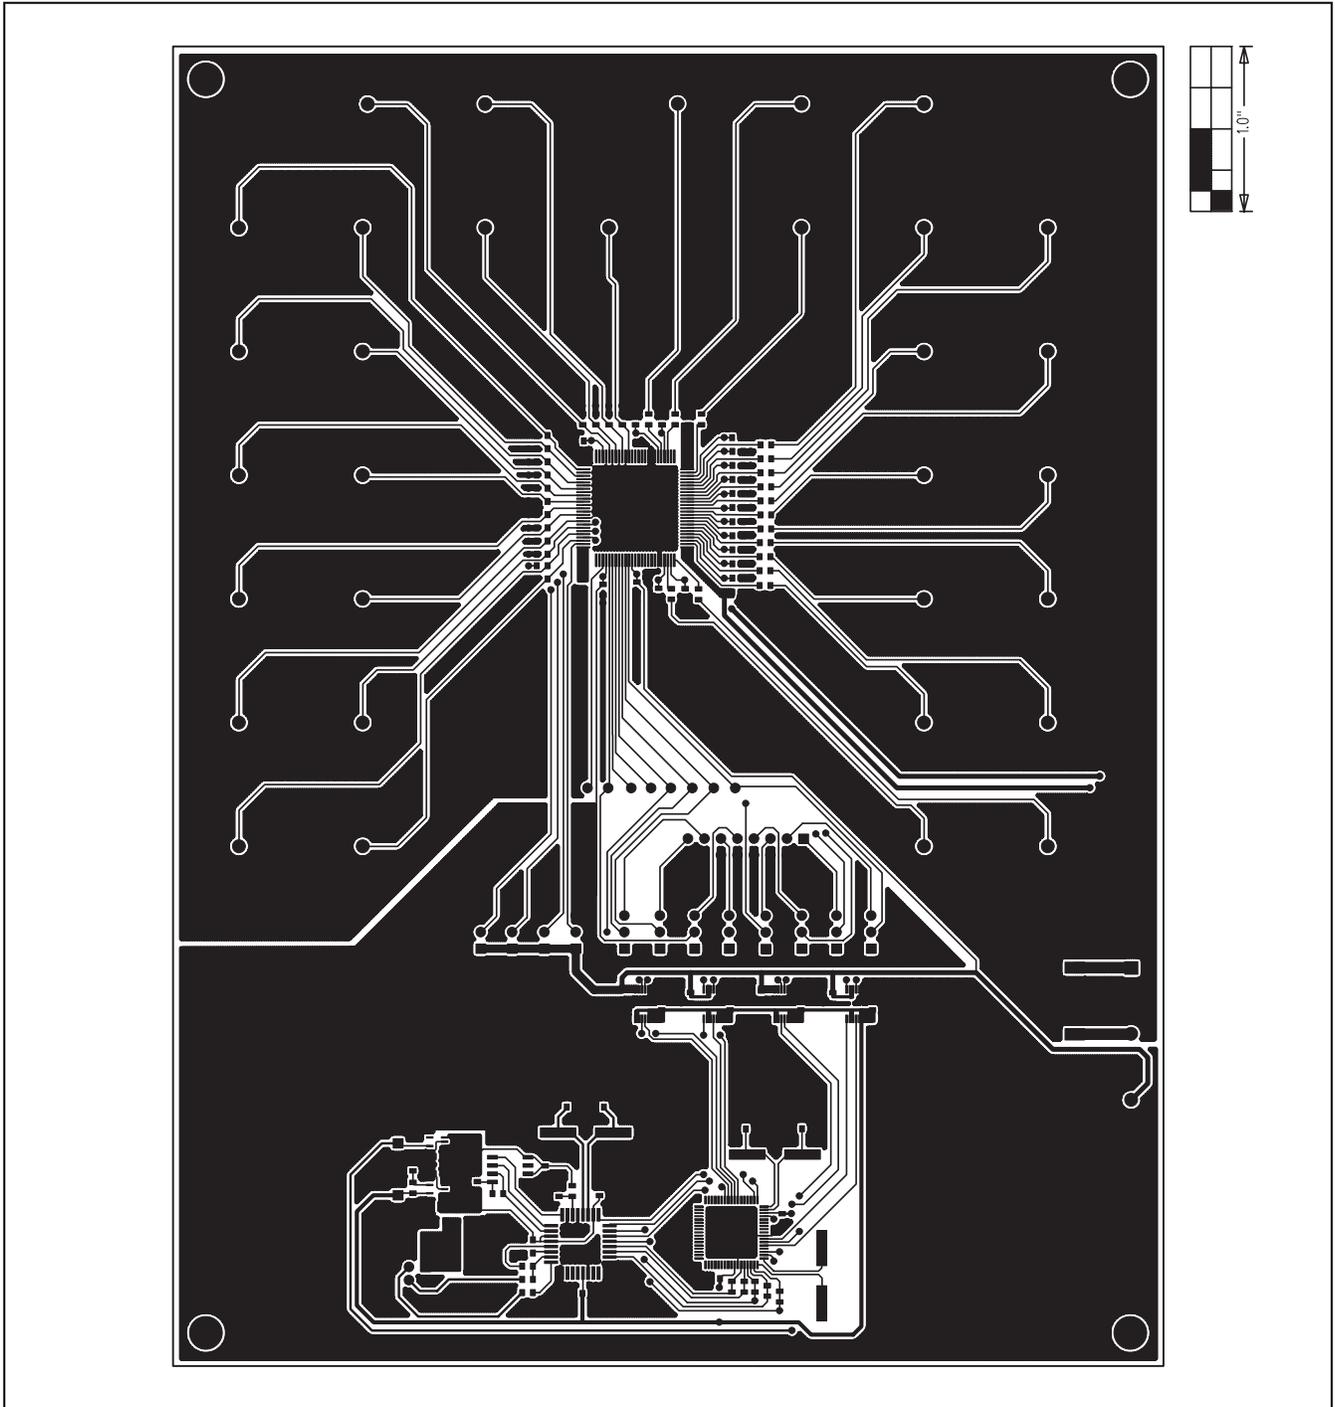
MAX9675 EV Kit PCB Layout—Component Side
